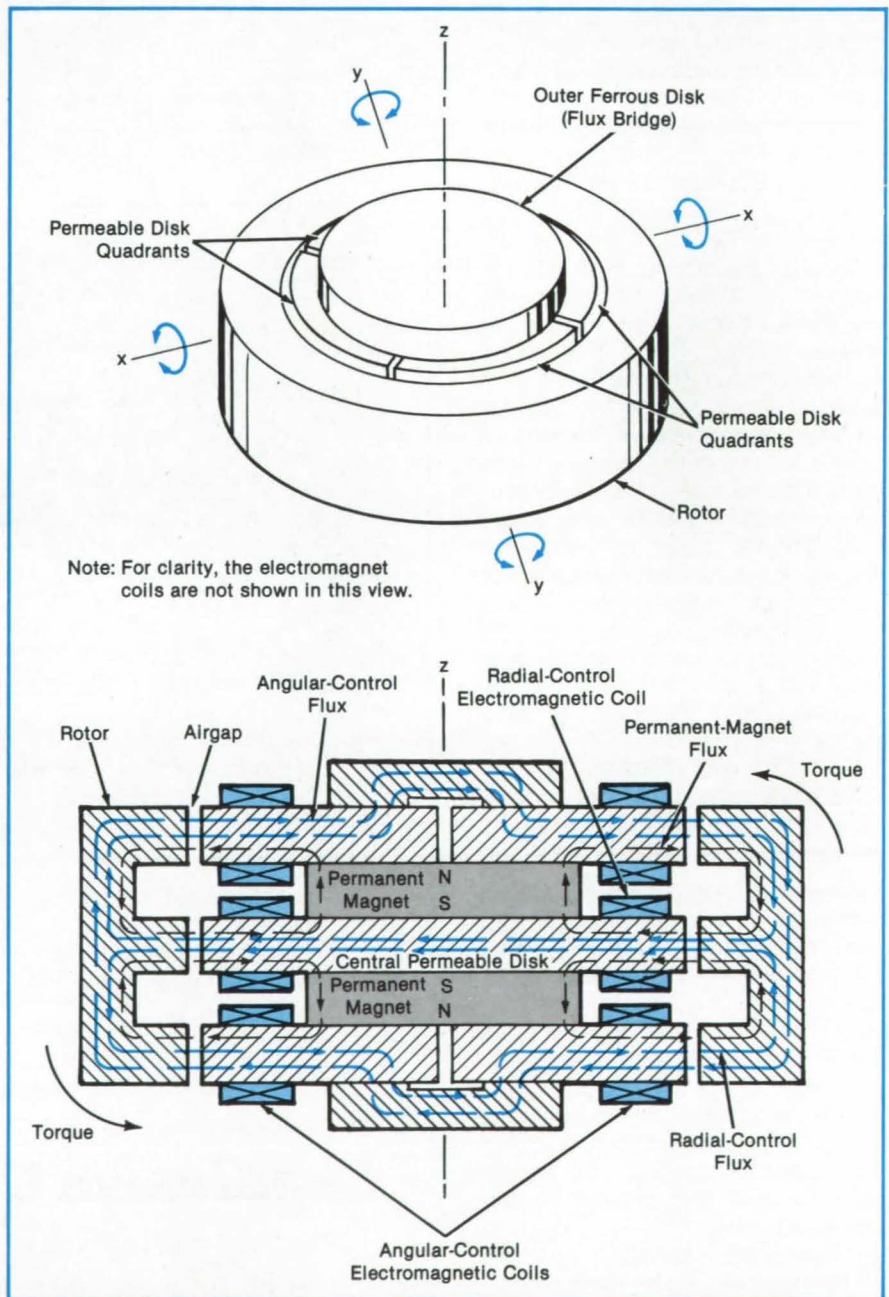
The Active Magnetic Bearing includes electromagnet coils that tilt the rotor clockwise or counterclockwise, or move it right or left.
